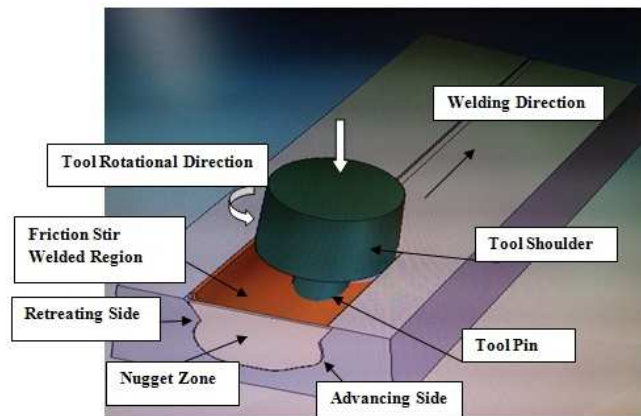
Schematic Representation of Friction Stir Welding
